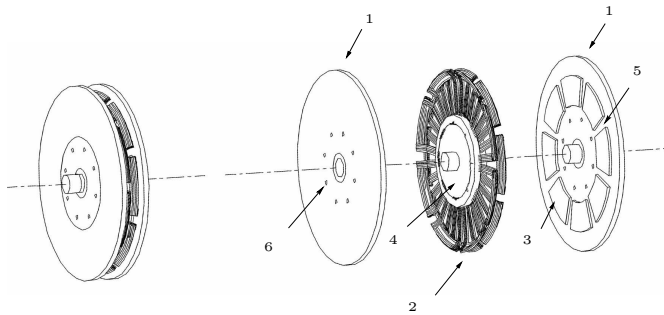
Exploded view of an AFPM machine, 1 – rotor discs, 2 – stator winding, 3 – permanent magnets, 4 – epoxy core, 5 – radial channels, 6 – air-inlet holes.
